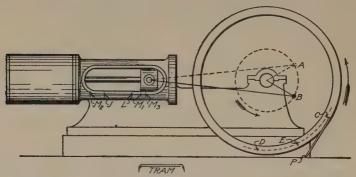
Sketch of Engine, Showing Method of Putting Engine on Center
